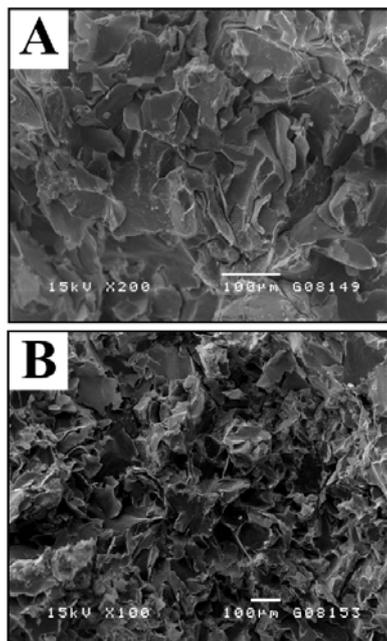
Tensile fracture surfaces of the mold wall thickness of 1.5 inch.
